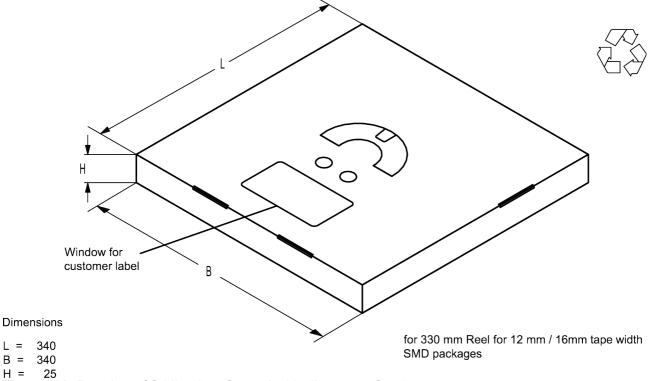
Drawing of folding box for reel with diameter of 330 mm.
